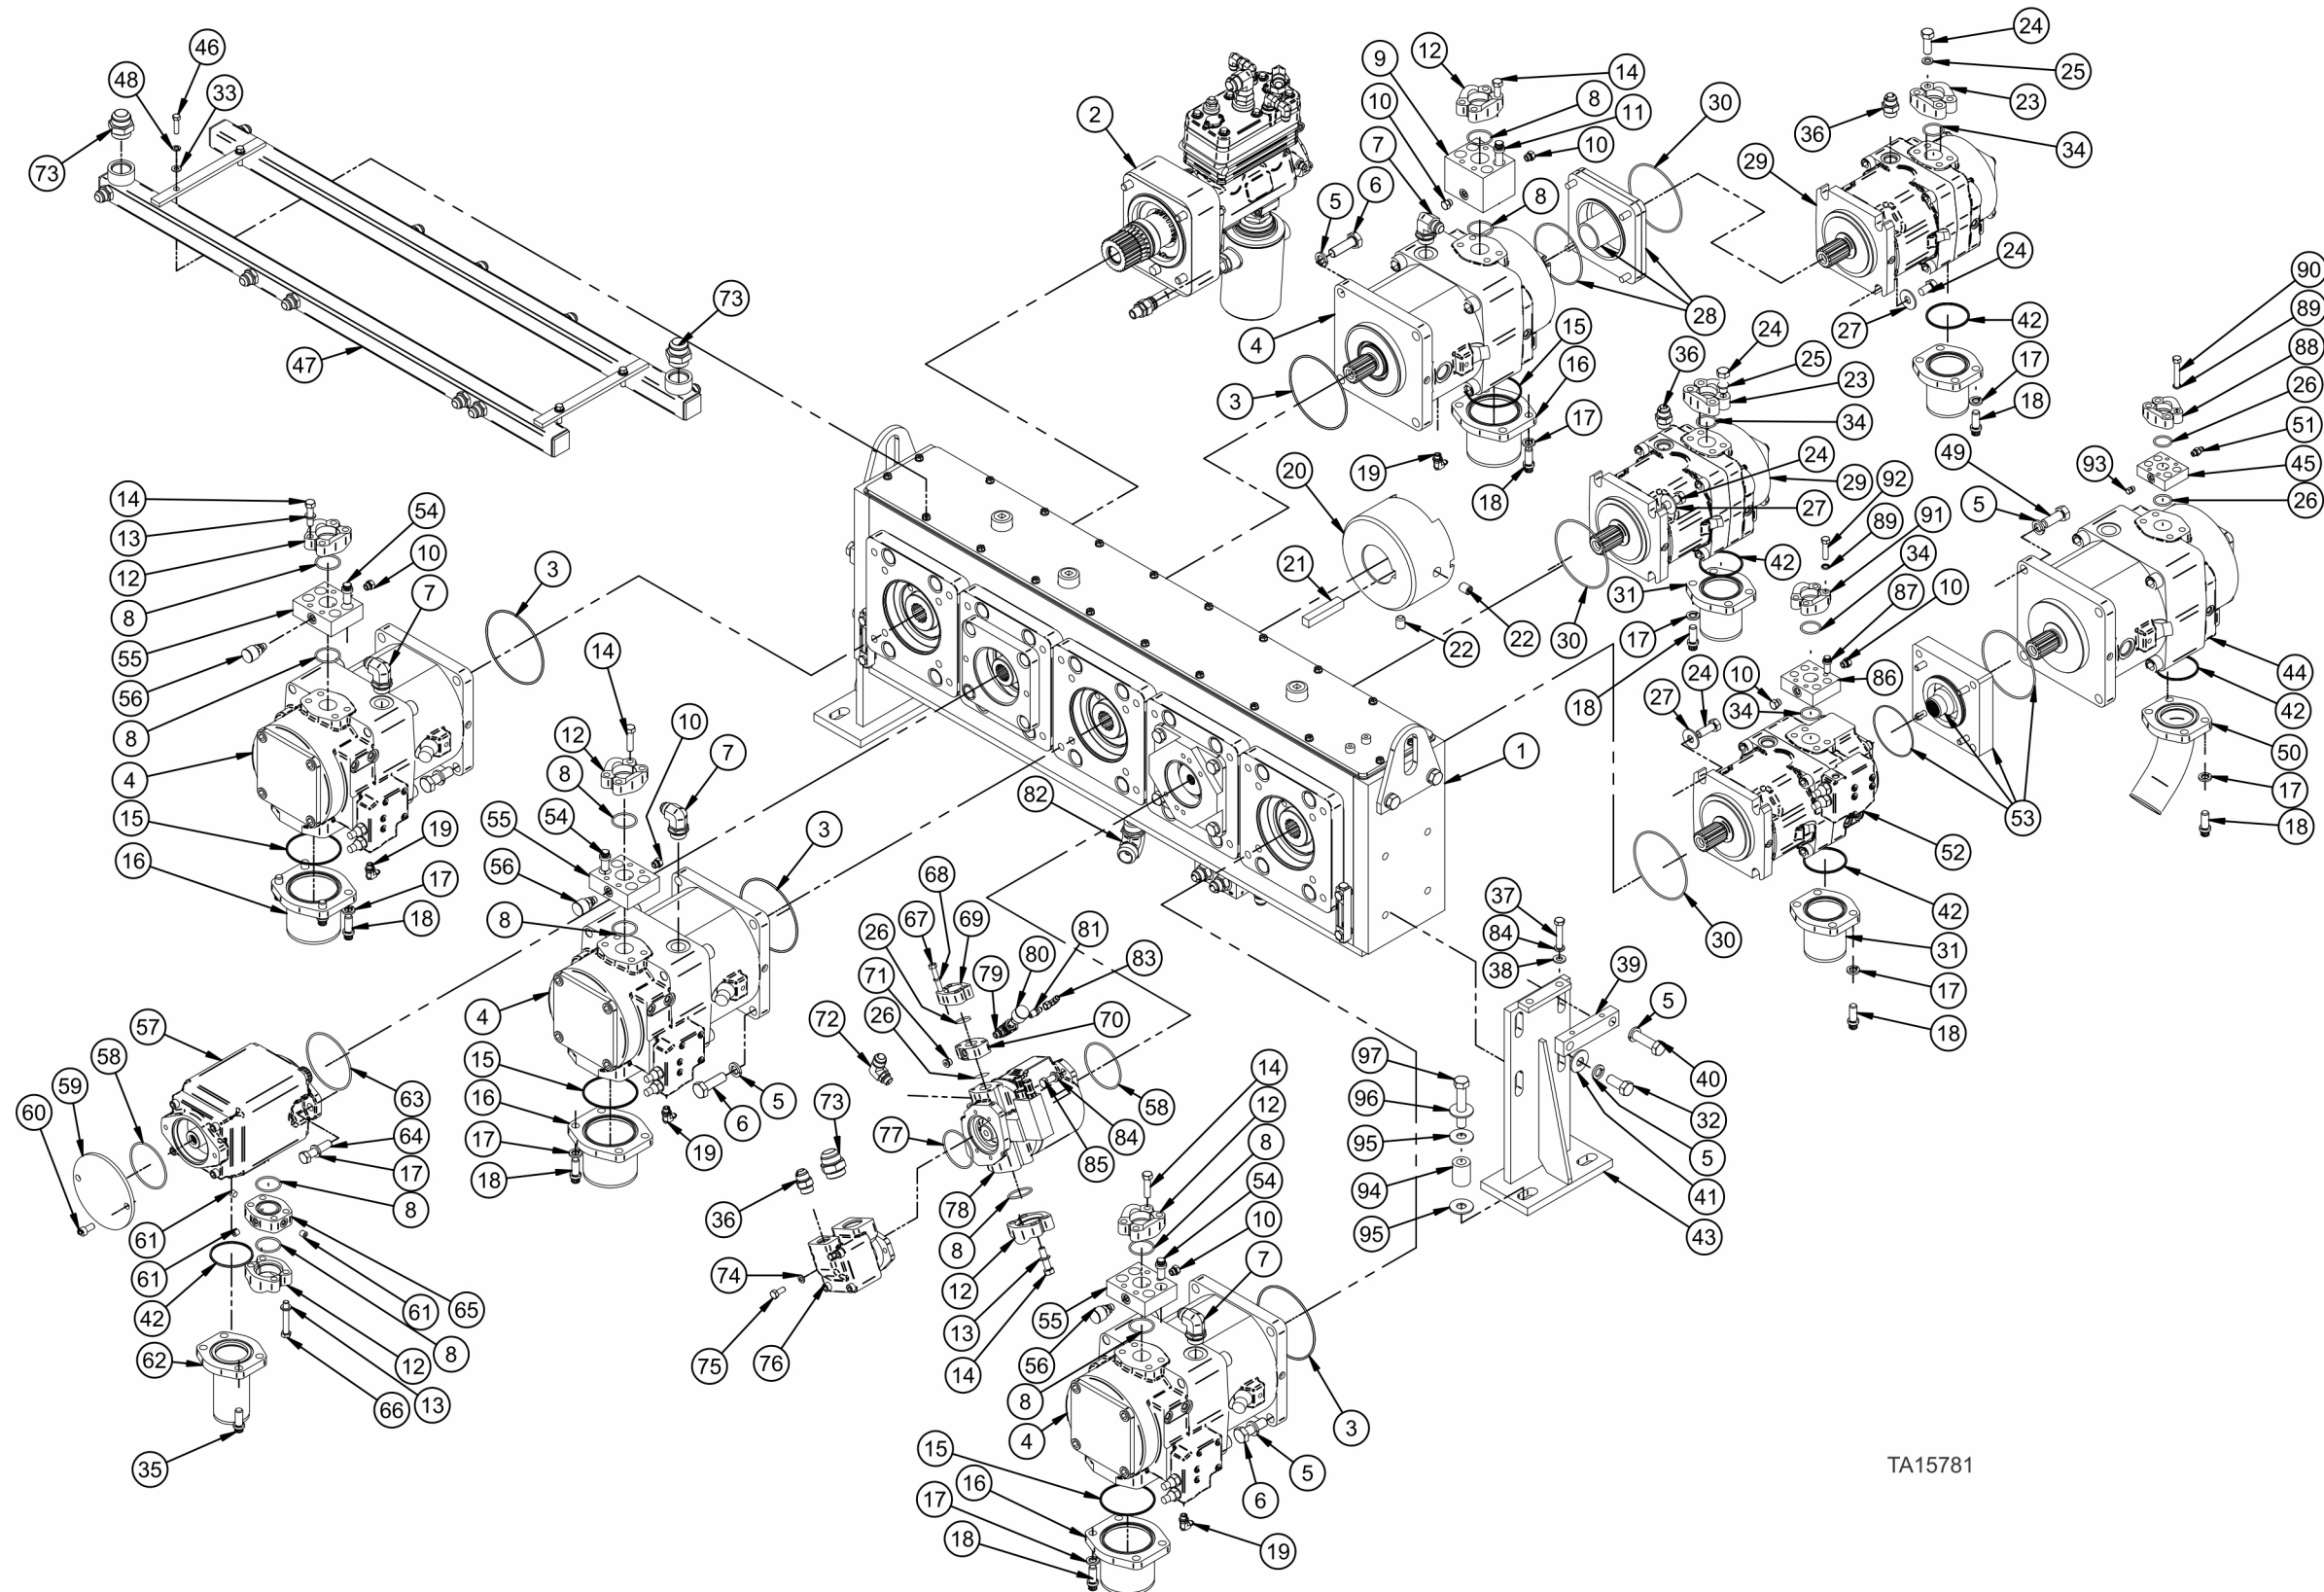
HPD gearbox and pumps Tier 4 engine (typical)
